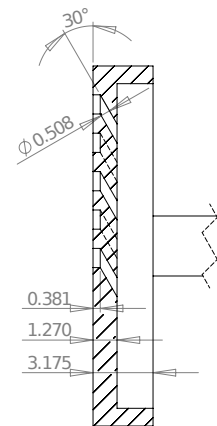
Drawing of five row of cylindrical hole test coupon; freestream flow from bottom to top; dimensions in mm
